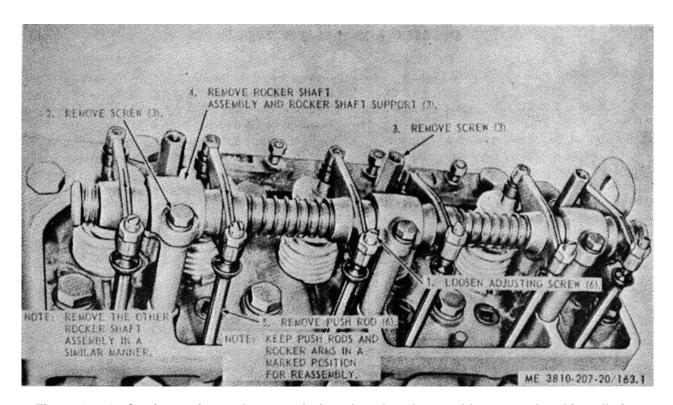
Carrier engine rocker arm shaft and push rod assembly, removal and installation
